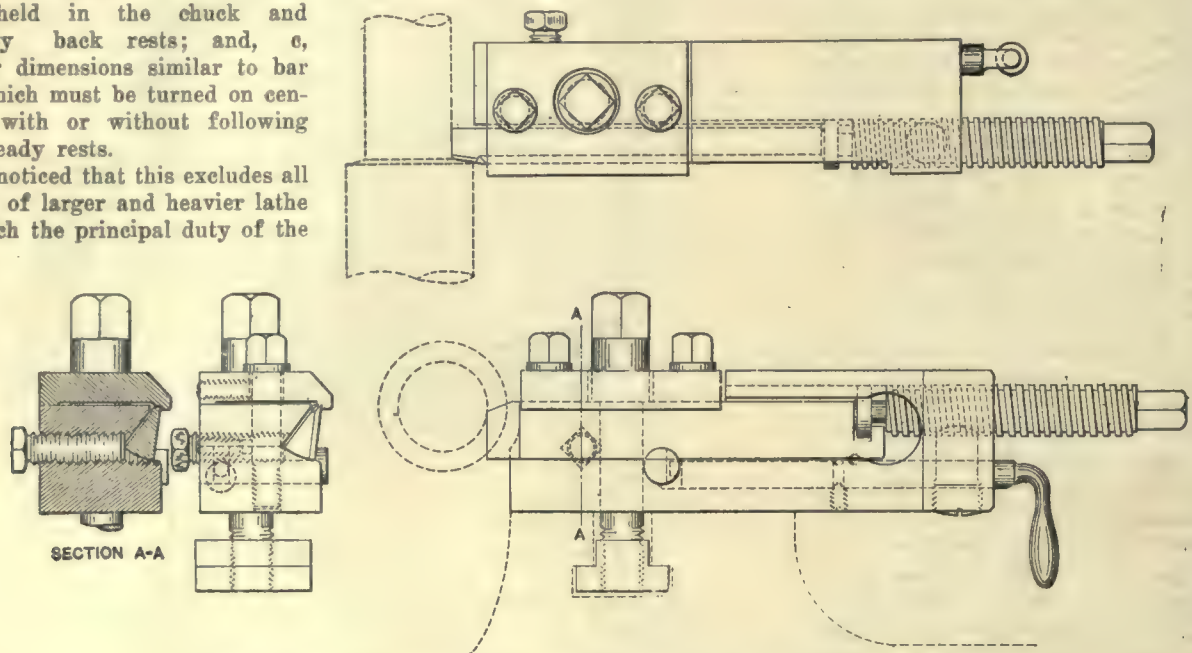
Form of Turning Tool and Holder for Engine Lathe.
